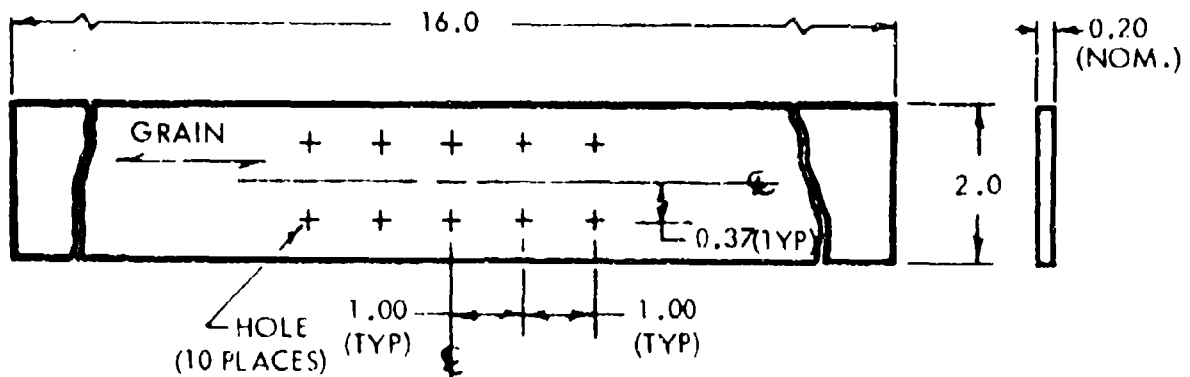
Fatigue Crack Sizes and Locations in Flat Panels
